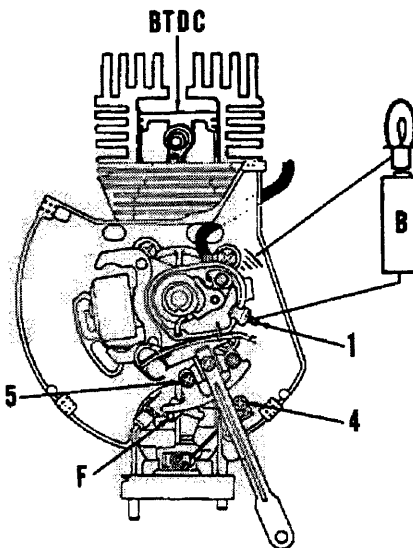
View showing controls and points of adjustment for adjusting maximum ignition advance and maximum throttle opening. The cam and/or carburetor may be damaged if cam attempts to open throttle further than possible.
